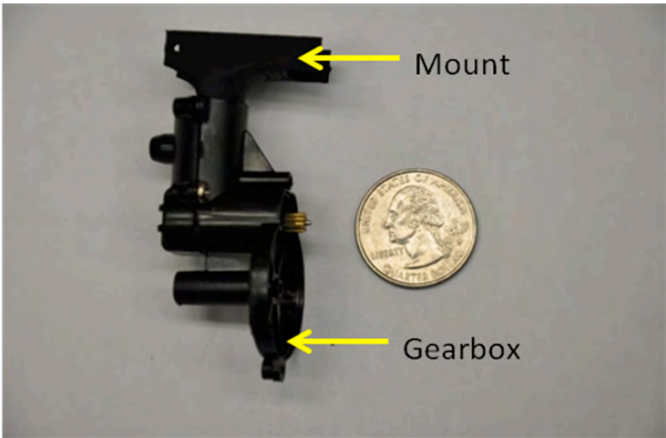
Picture showing ‘the mount’ attached to the salvaged motor and gearbox holder
